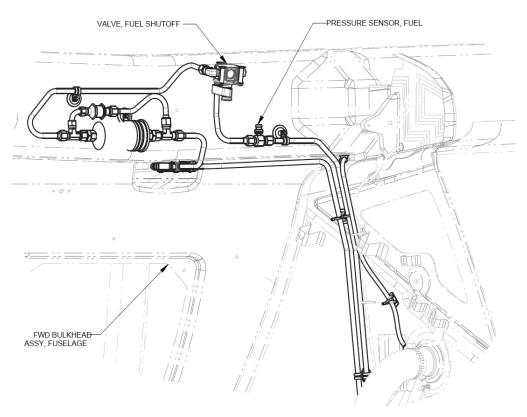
FUEL PRESSURE SENSOR LOCATION
